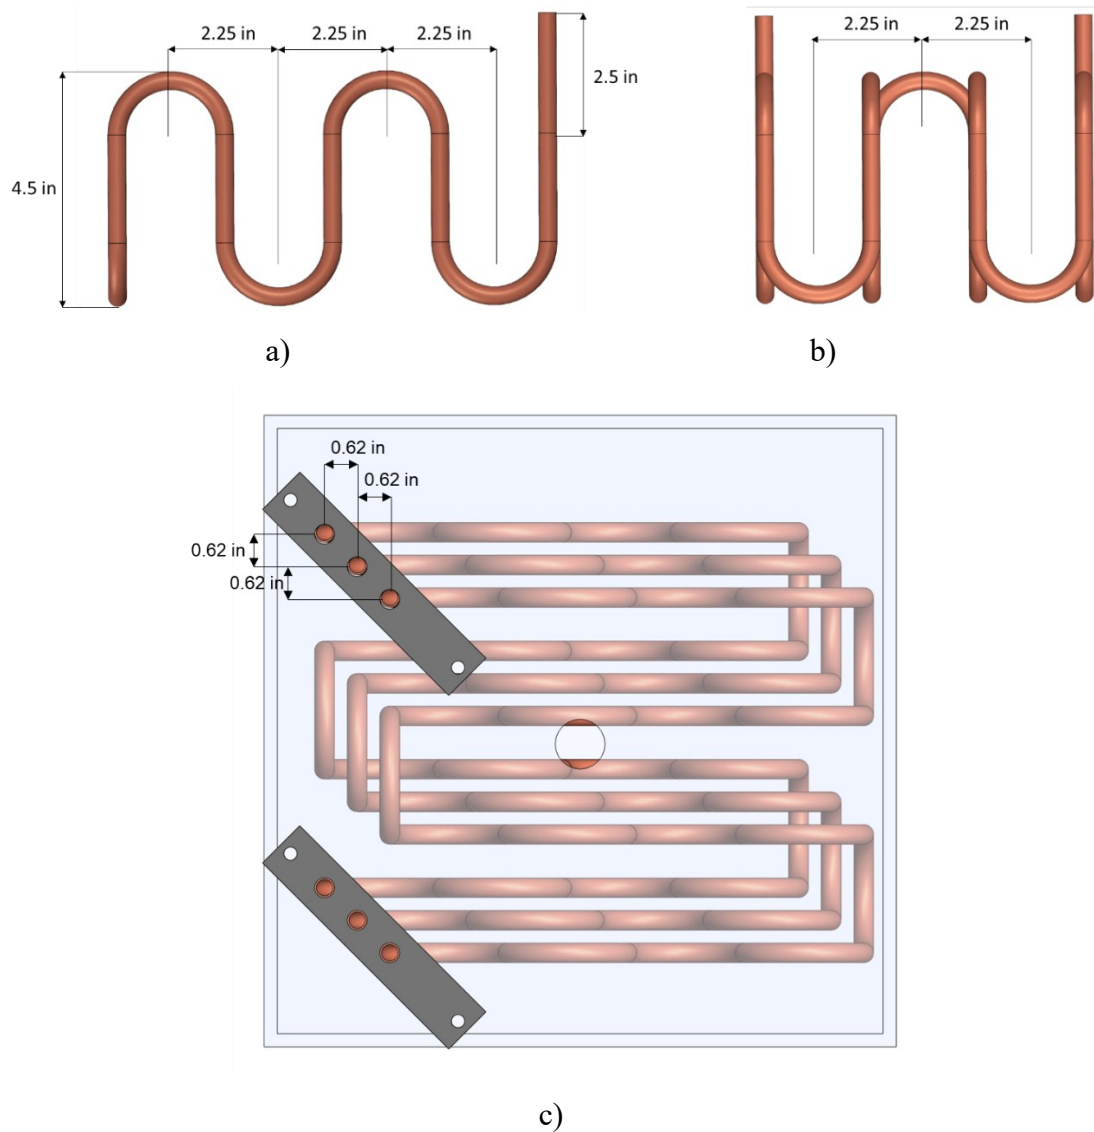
a) Front b) side and c) top view of the coil(s) with various dimensions
